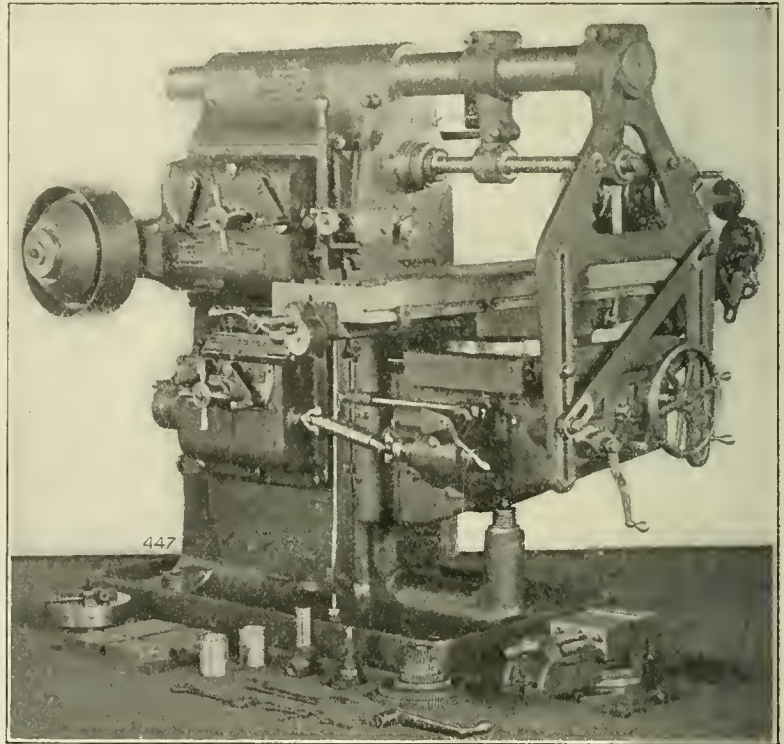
PLAIN HORIZONTAL MILLING MACHINE WITH RIGHT-ANGLE DRIVE.
